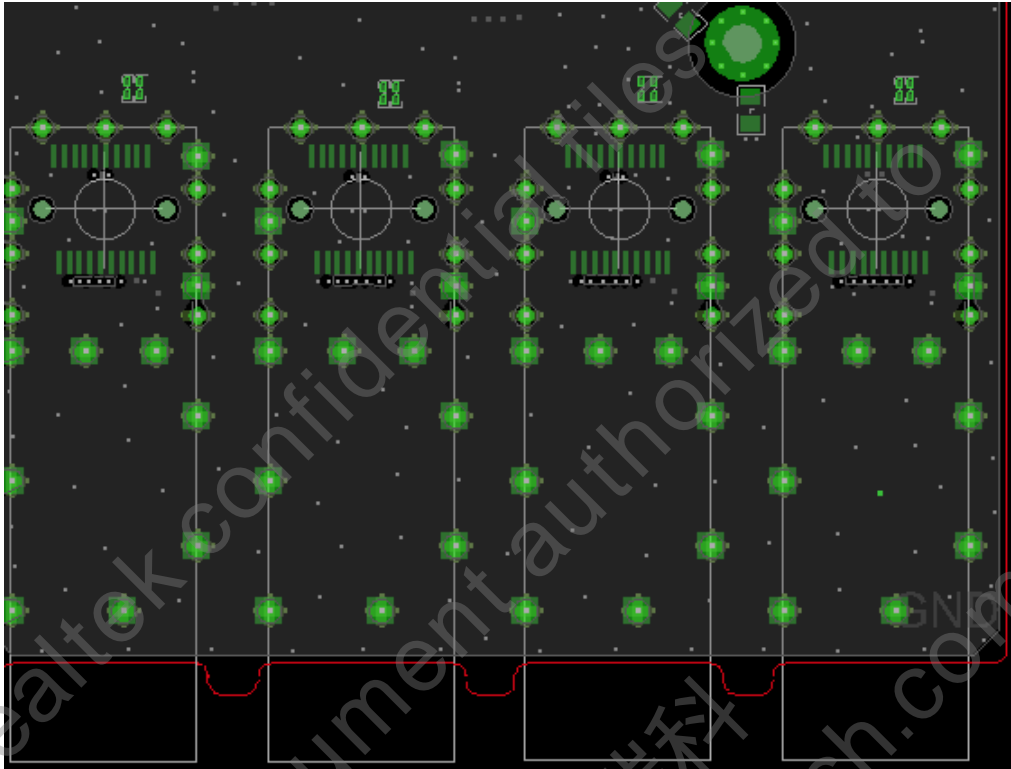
GND plane on Layer 2 in 4-layer PCB for Fiber
